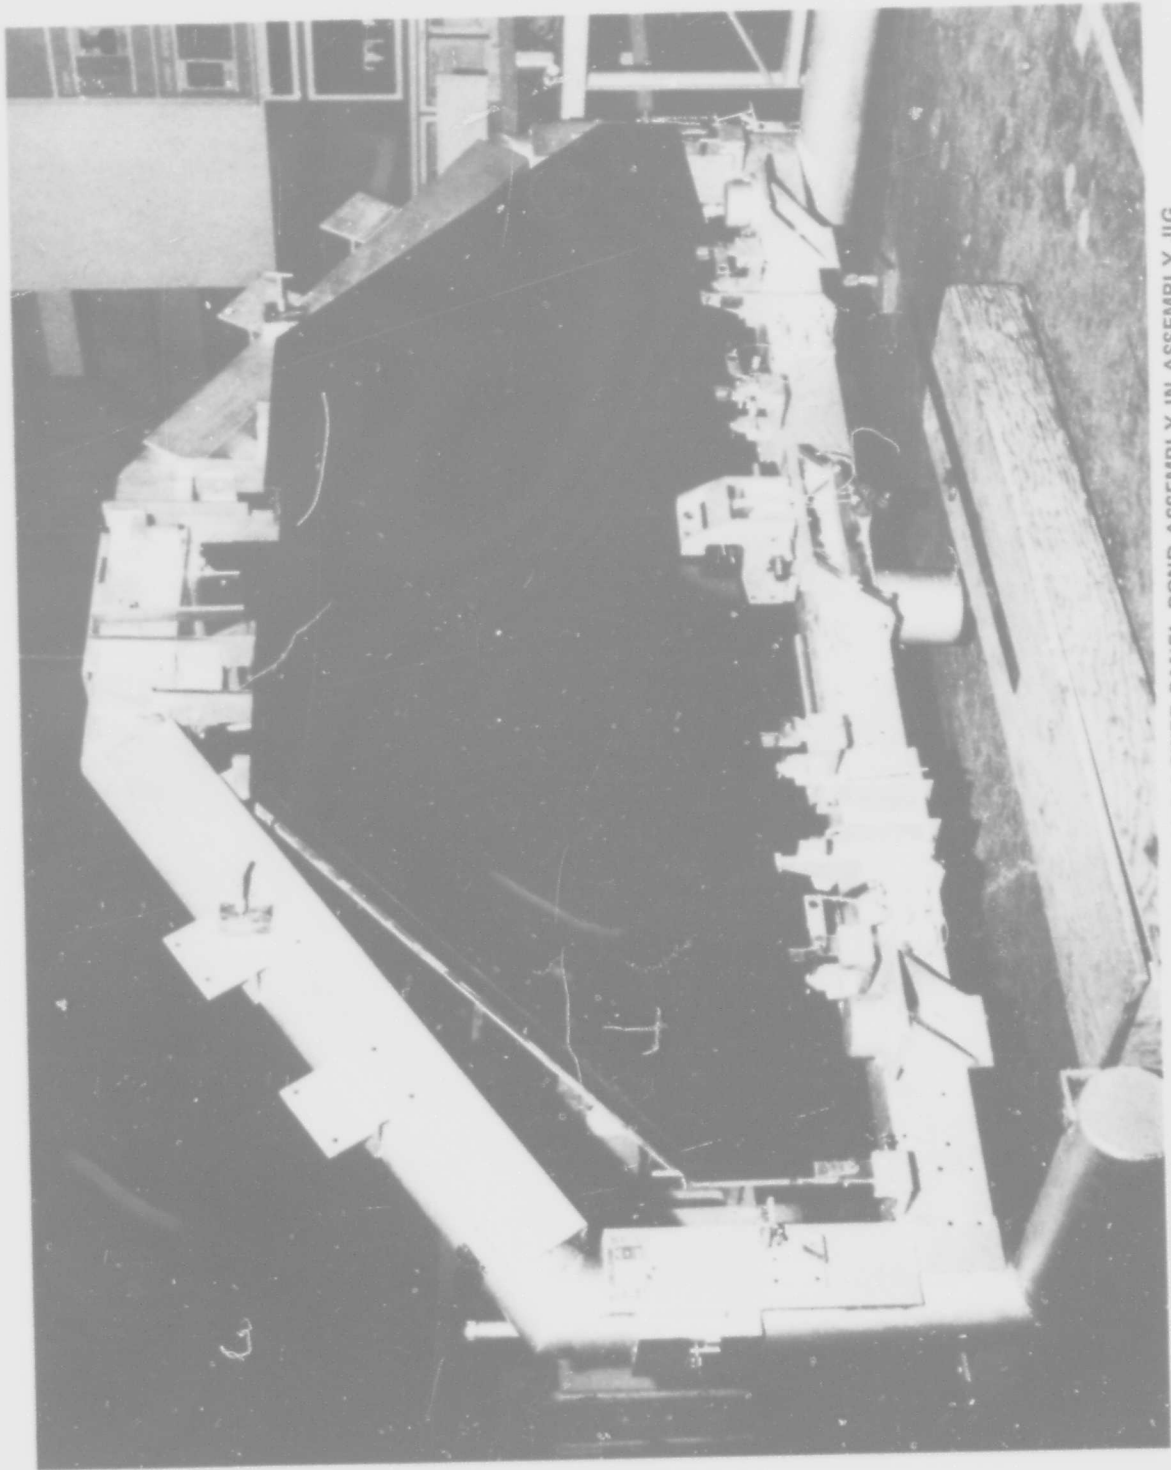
SUBSTRUCTURE AND LOWER PANEL BOND ASSEMBLY IN ASSEMBLY JIG
